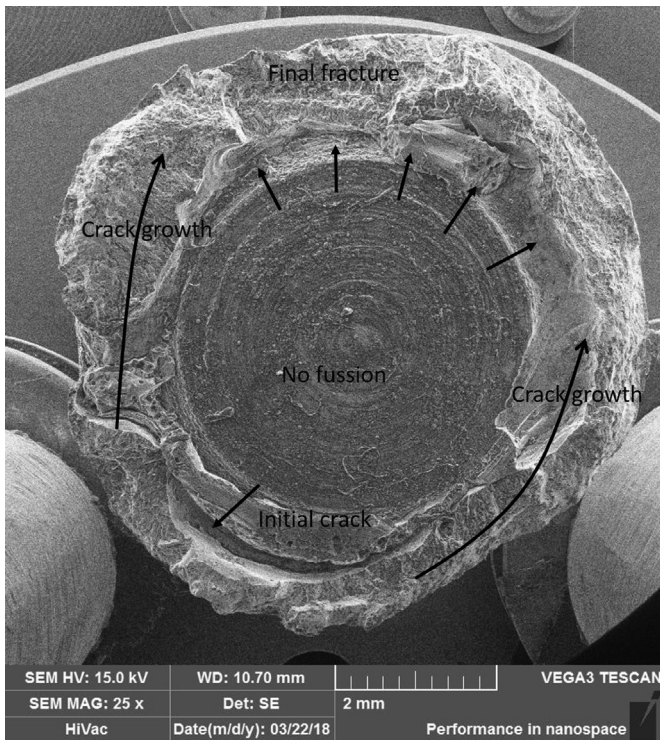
Fracture surface of fatigue test for underwater weld in depth of 2.5 m.
